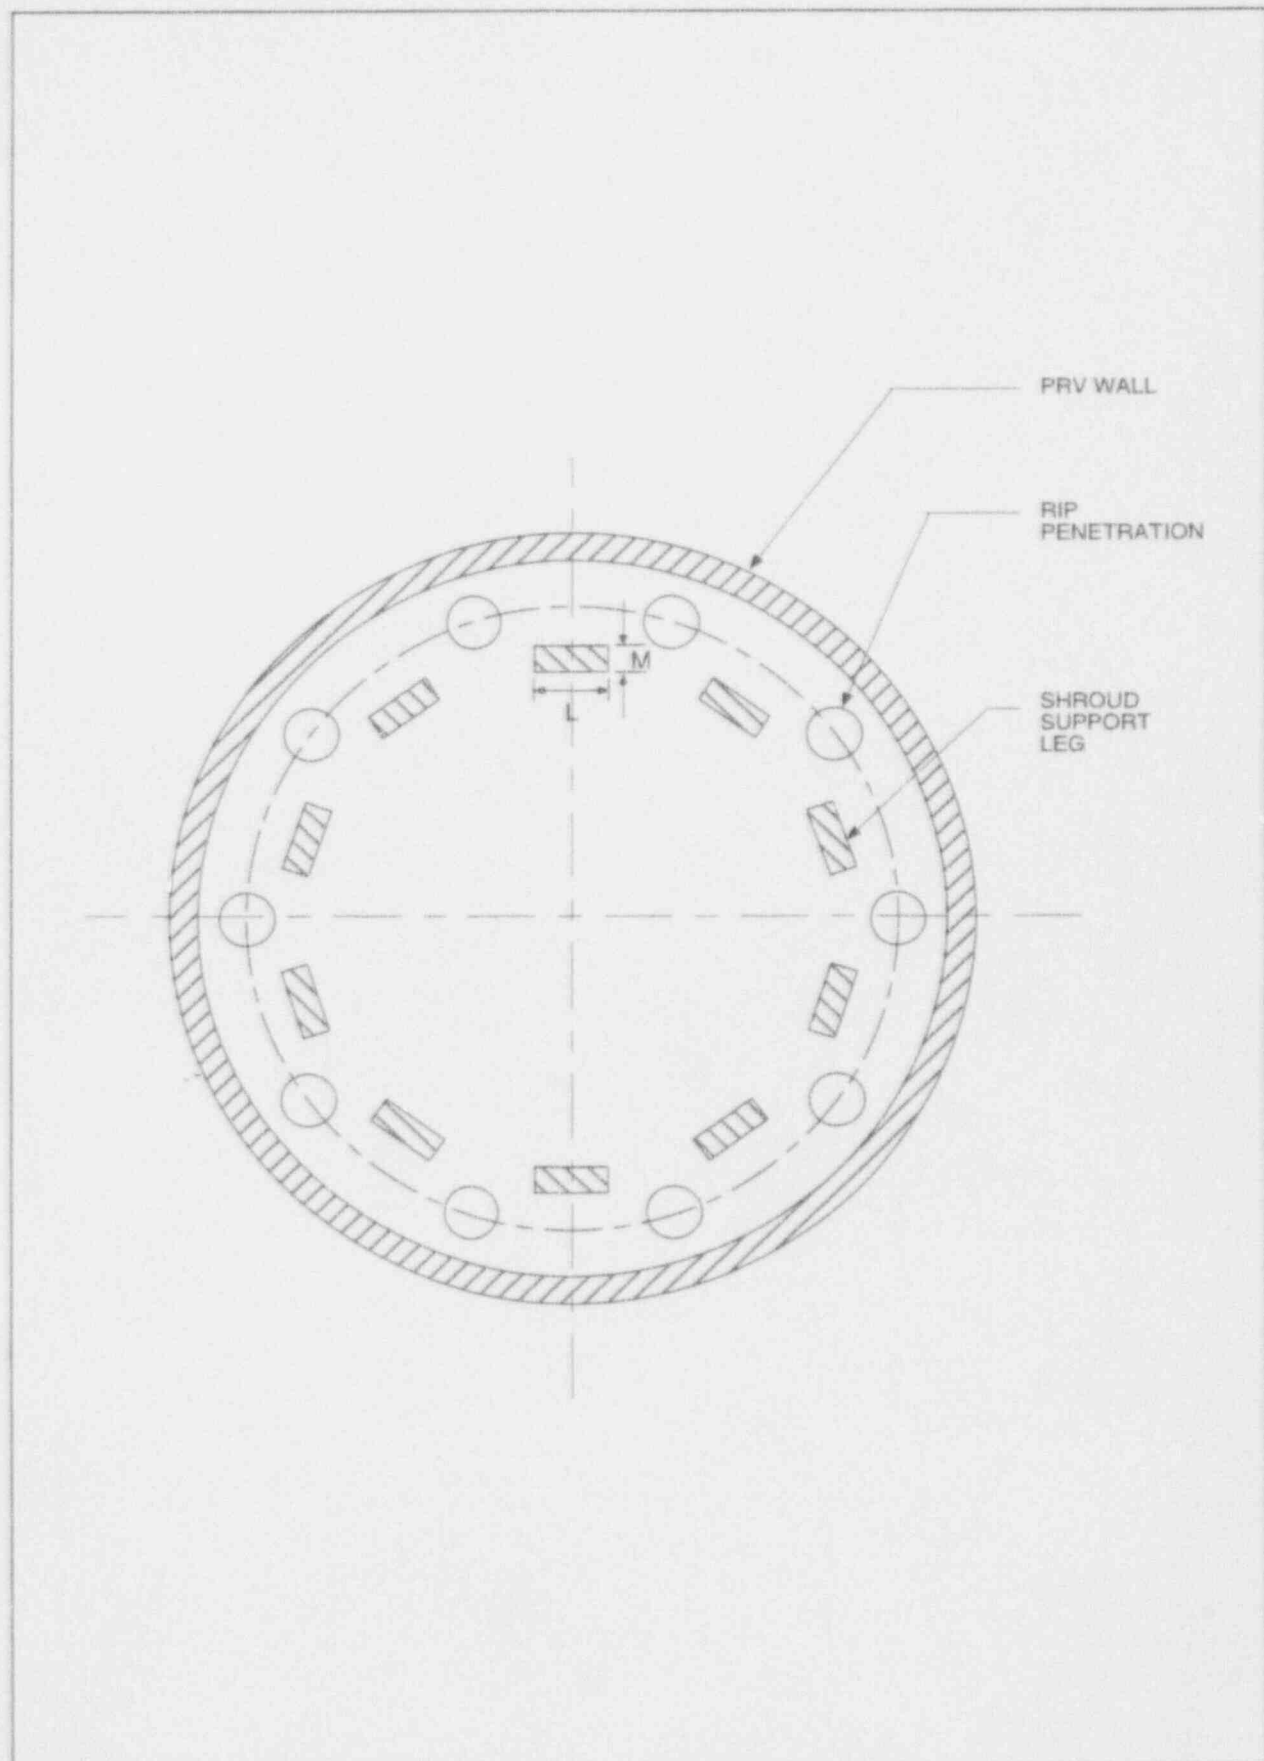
Pump Penetration and Shroud Support Leg Arrangement
